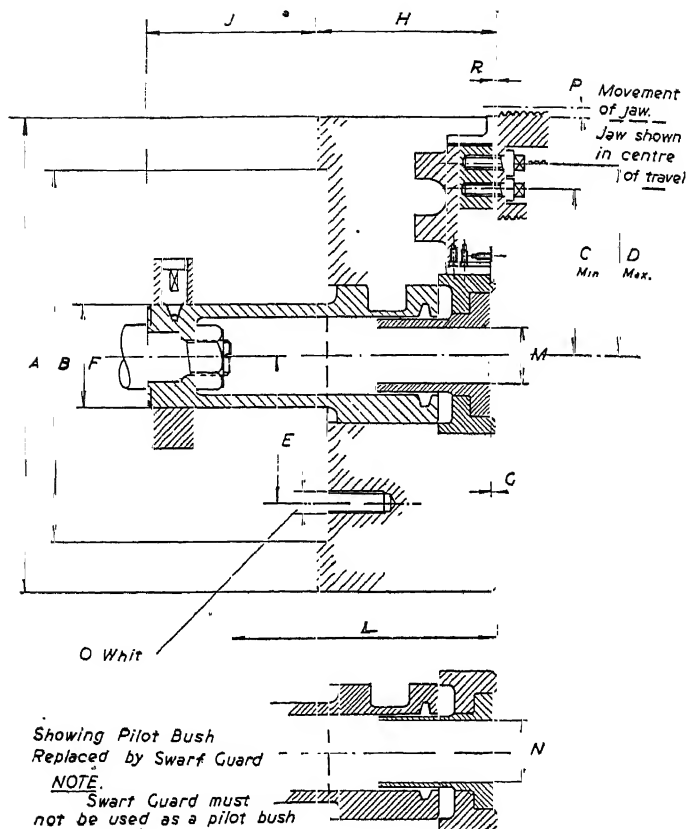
The Herbert 9-in. to 32-in. air chuck.
